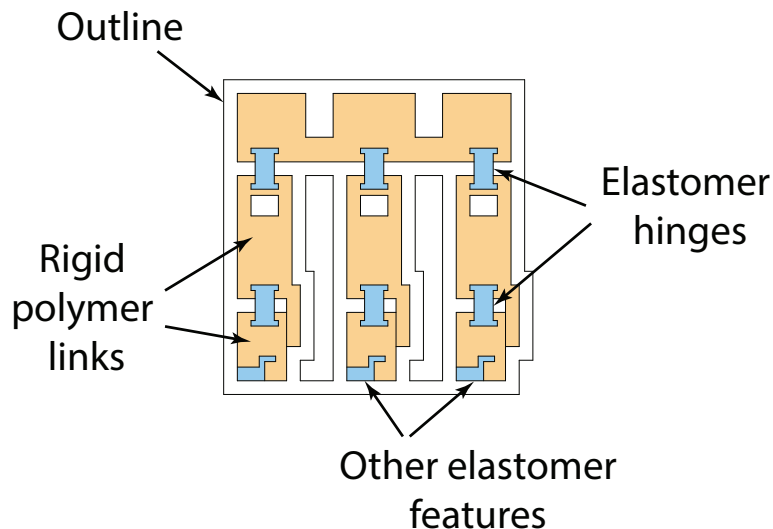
CAD outline drawing of a mechanism for LaCER fabrication. Color added for clarity.
